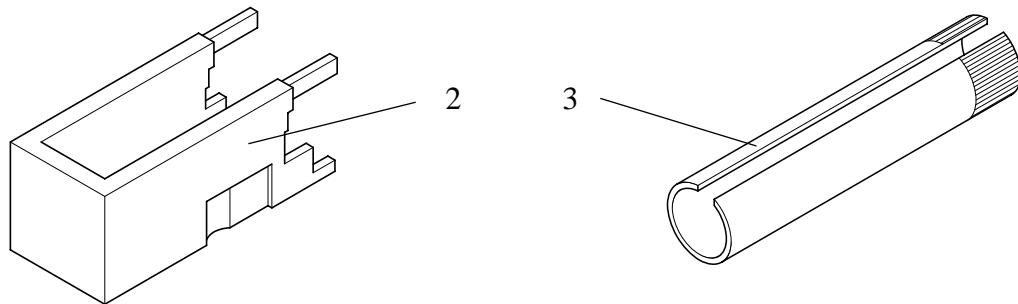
Dismounting Tool (2) and Assembly Key (3)
